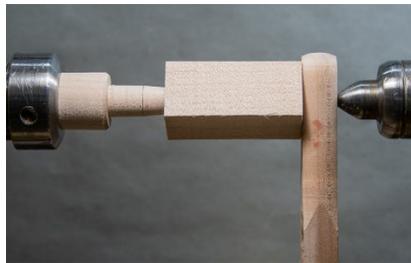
Press the blank onto the Mandrel using the Removal Tool and the tailstock center.
